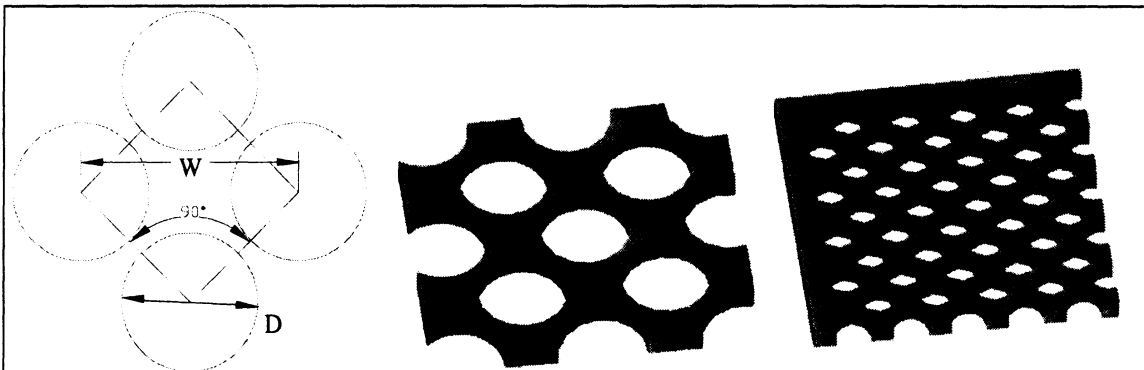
Hole patterns micro-machined into the substrates of the tapered slot antennas. The larger hole pattern has a hole diameter, D , of 3.175 mm (125 mils), and a spacing, W , of 5.08 mm (200 mils). The smaller hole pattern has hole diameters of 1.27 mm (50 mils), and spacing of 2.032 mm (80 mils).
